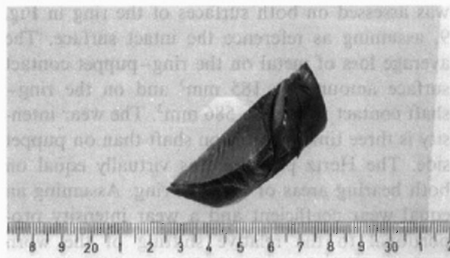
(a) and (b). Surface of the final shaft rupture on the smaller piece in Fig. 3. The shear fracture is shaded in Fig. 6b.
